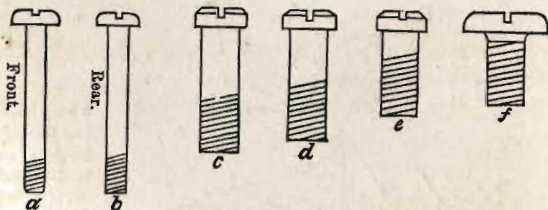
Lock-screws, full size, and side-screws, half size. *a, b*, side-screws; *c*, sear-screw; *d*, bridle-screw; *e*, sear-spring screw; *f*, tumbler-screw.
